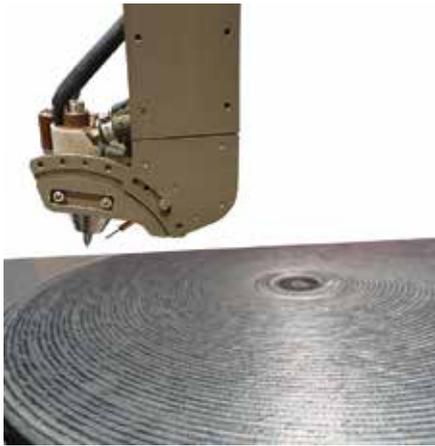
• Adjustment of electrodes and wire for the cladding of the flange surface and example of a cladded specimen.
